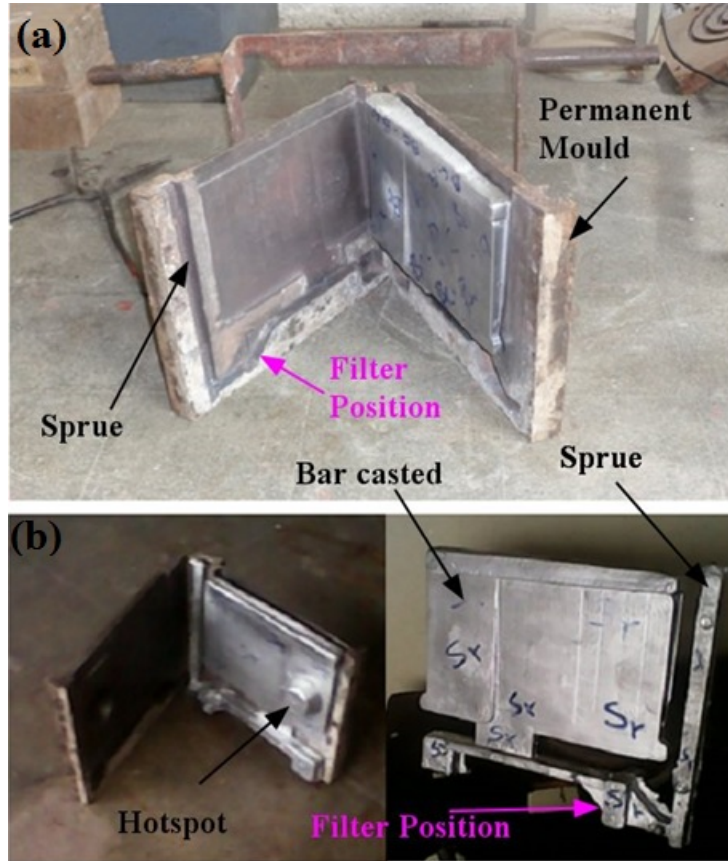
(a) Permanent cast iron mould and (b) Sample bar casting
